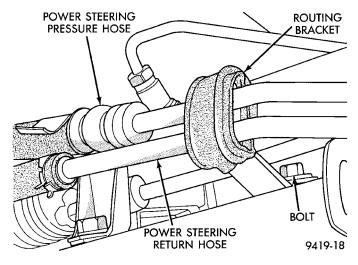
Power Steering Pressure And Return Hose Routing Bracket
